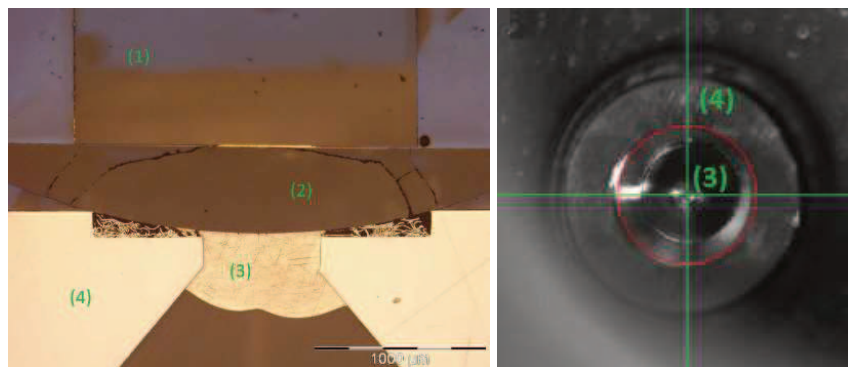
Left, Cross section of soldered component. Right, solderjet bump SAC305 applied from the DCB rear side pad. The mechanical strength provided by this $760\ \mu\text{m}$ bumps proved to withstand shear forces as high as $60\ \text{N}$ [78]. (1) laser component, and (2) $8\ \text{mm}$ half-sphere fused quartz substrate allowing 3DOF inside the KOVAR ring pad (4). (3) Applied $760\ \mu\text{m}$ SAC305 solderjet bump through the (4) small conical feeding geometry under the KOVAR ring pad.
